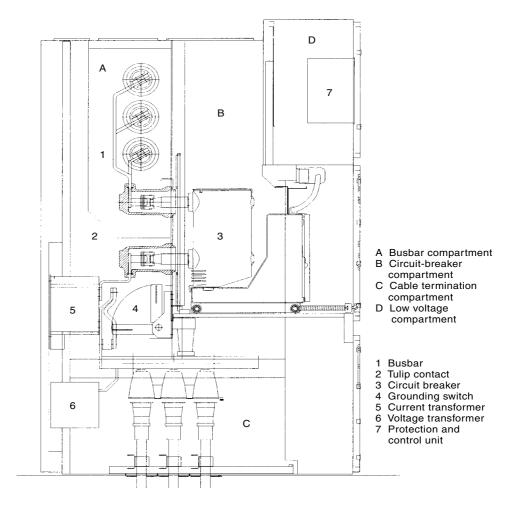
Switchgear panel for 24 kV, 25 kA (cross section).
